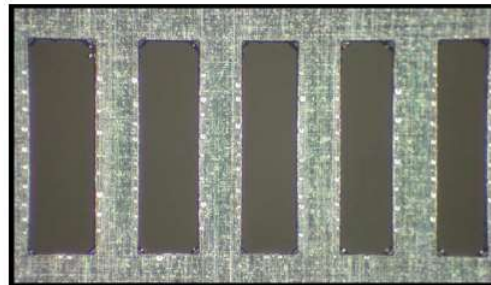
Bottom Side of a Nano-Coated Stencil After 20 Prints
